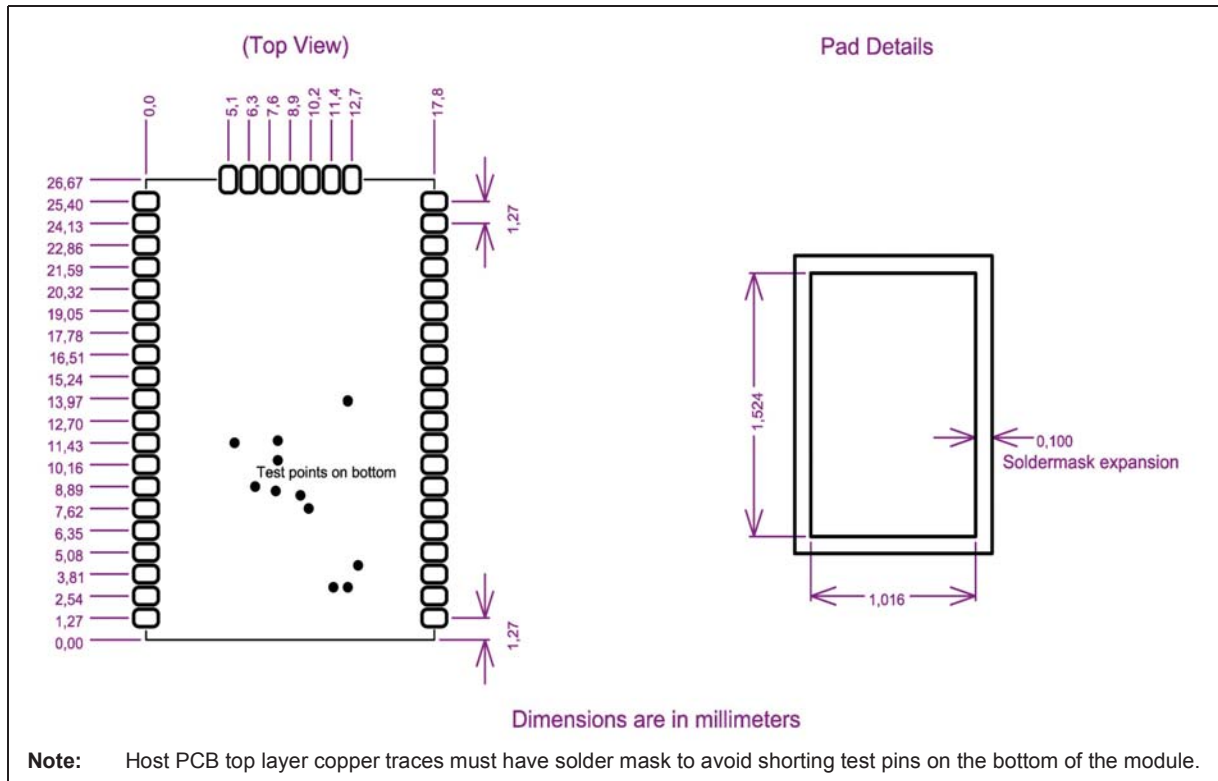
RECOMMENDED PCB FOOTPRINT
